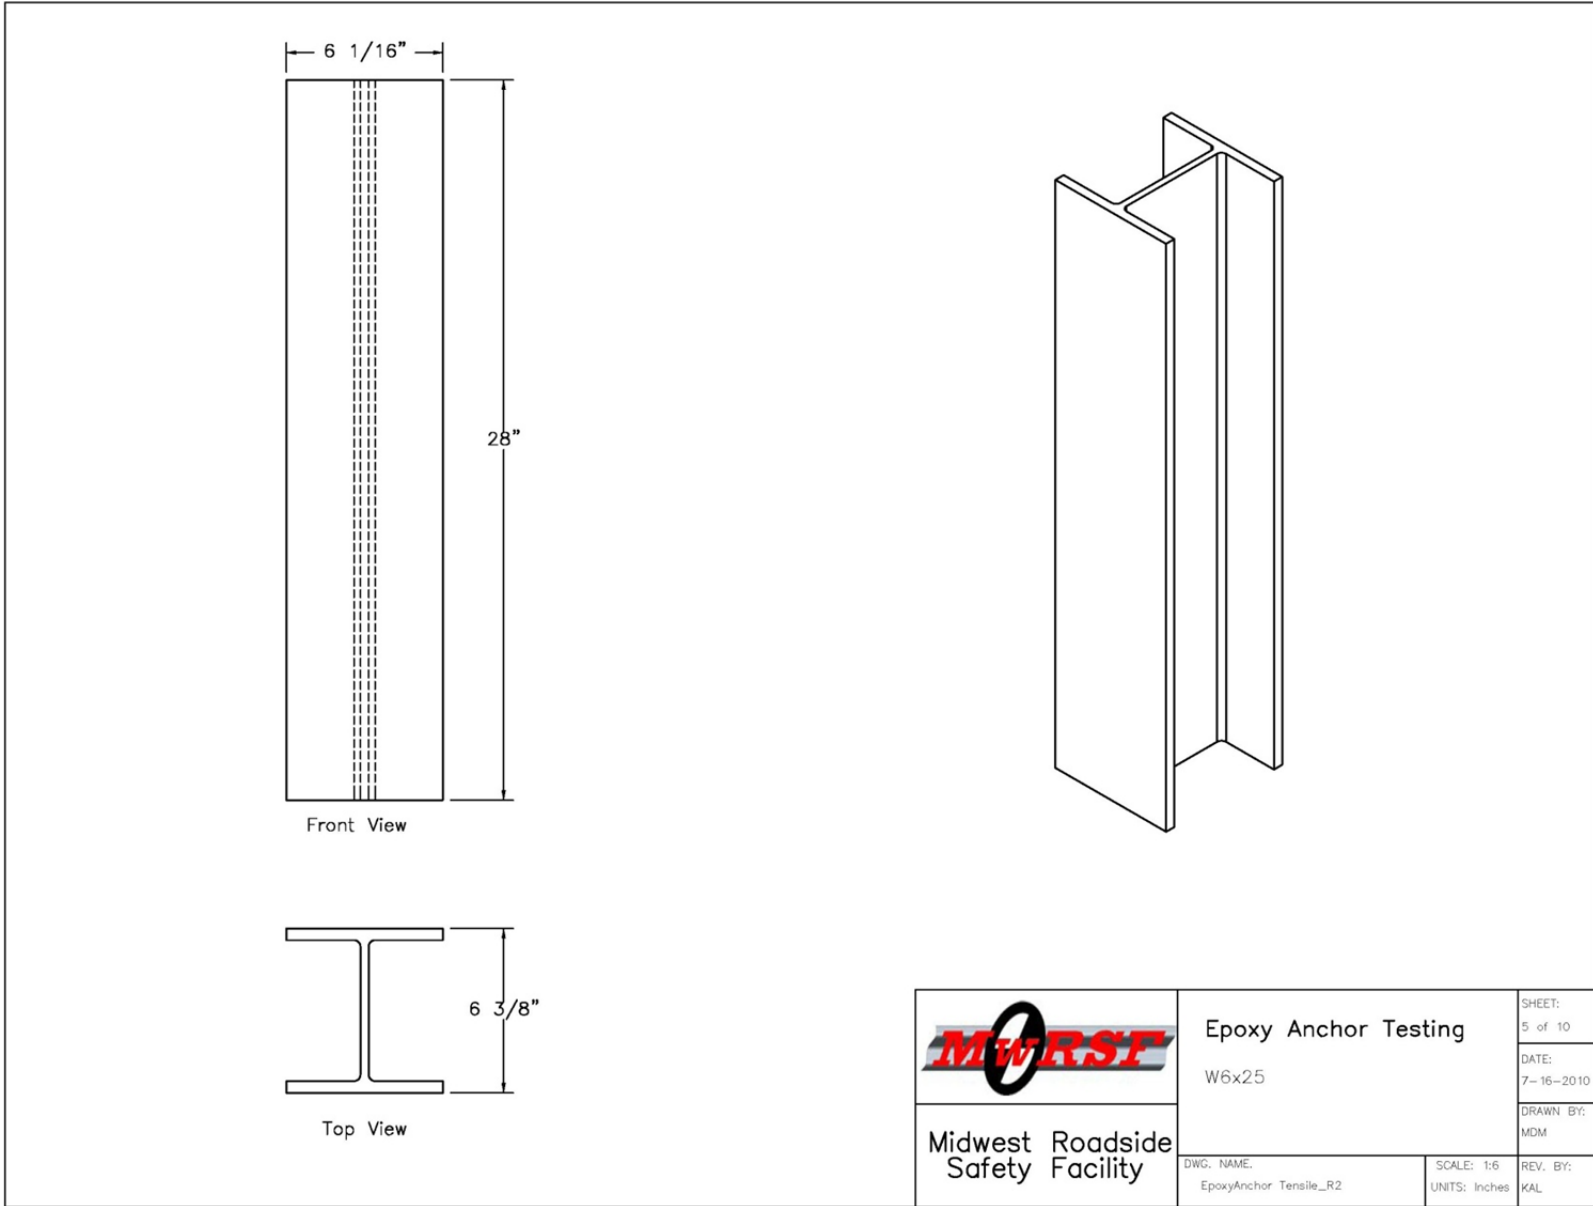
Tensile Test Jig W6x25 Beam Detail
